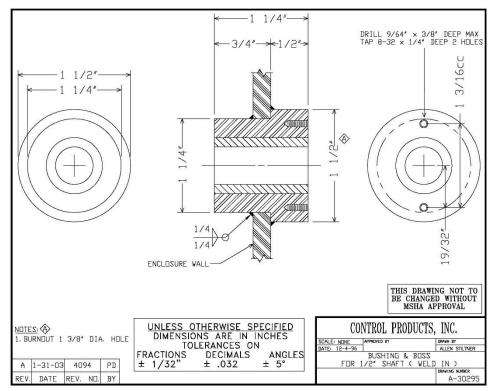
XP Enclosure Application OEM Weld-in Boss Drawing
